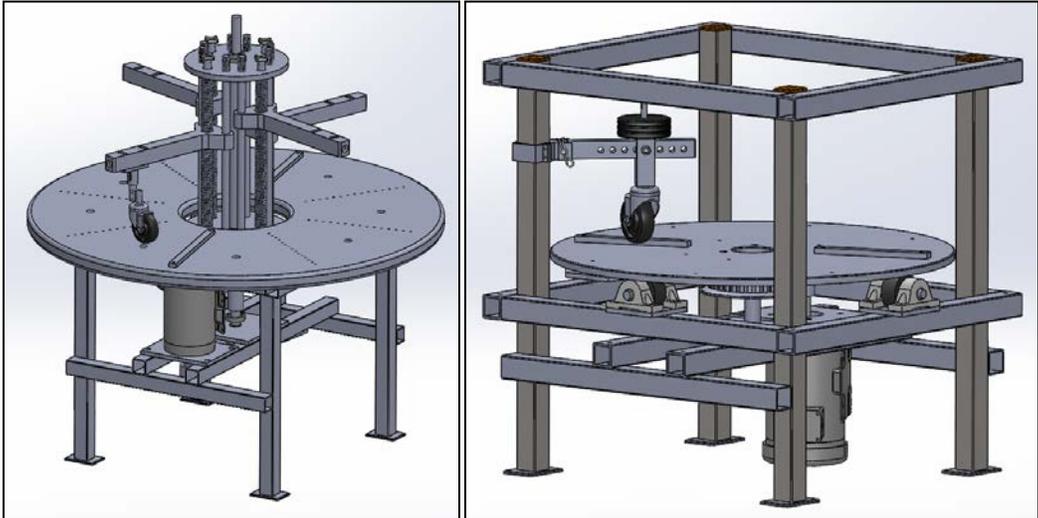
Caster assembly test design concepts #4 (left) and #5 (right)
